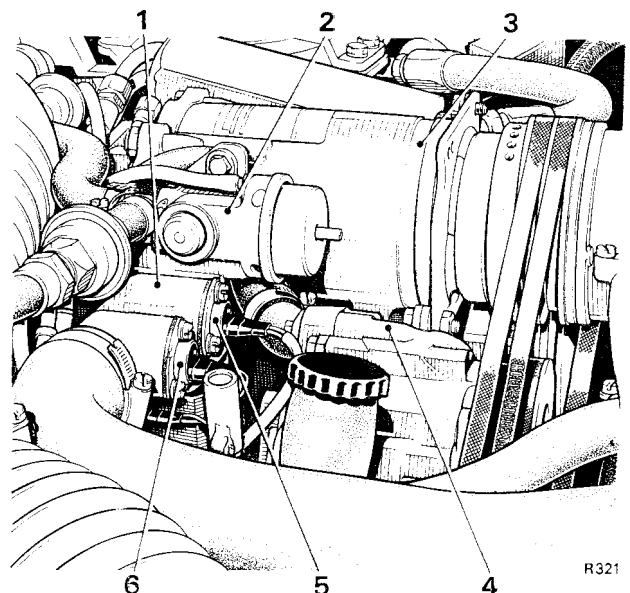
THERMOSTAT ELBOW CUT-IN SWITCHES
